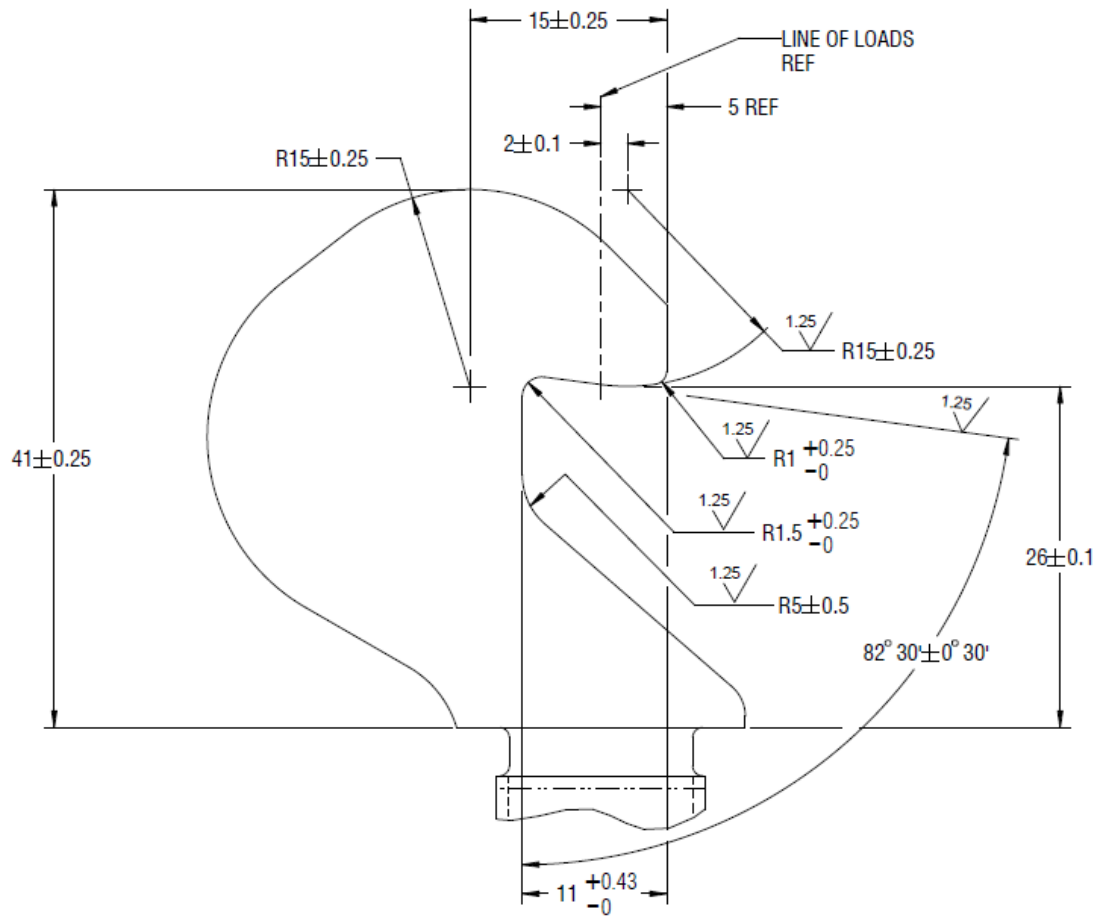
PASSIVE HOOK DETAIL VIEW
